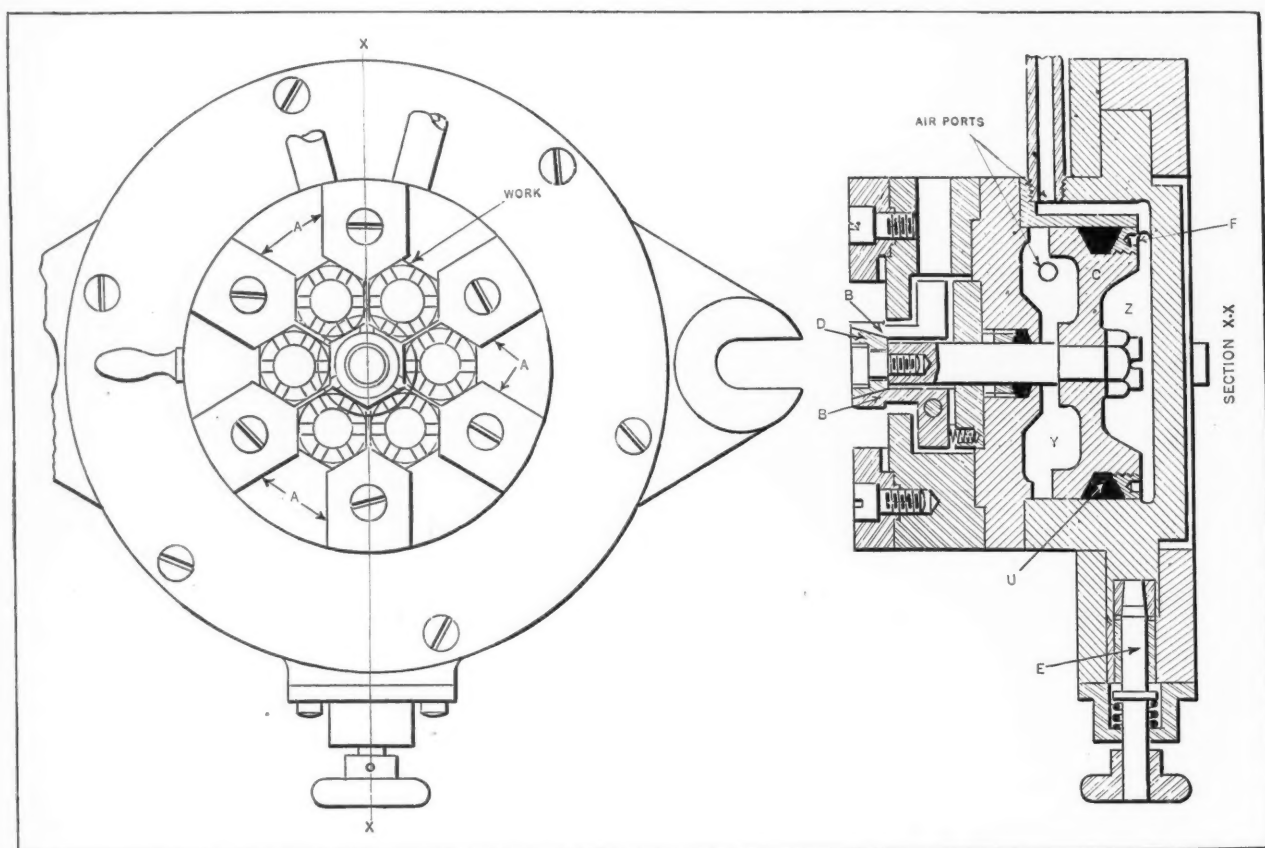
Indexing Fixture Designed for Castellating Six Nuts Simultaneously
